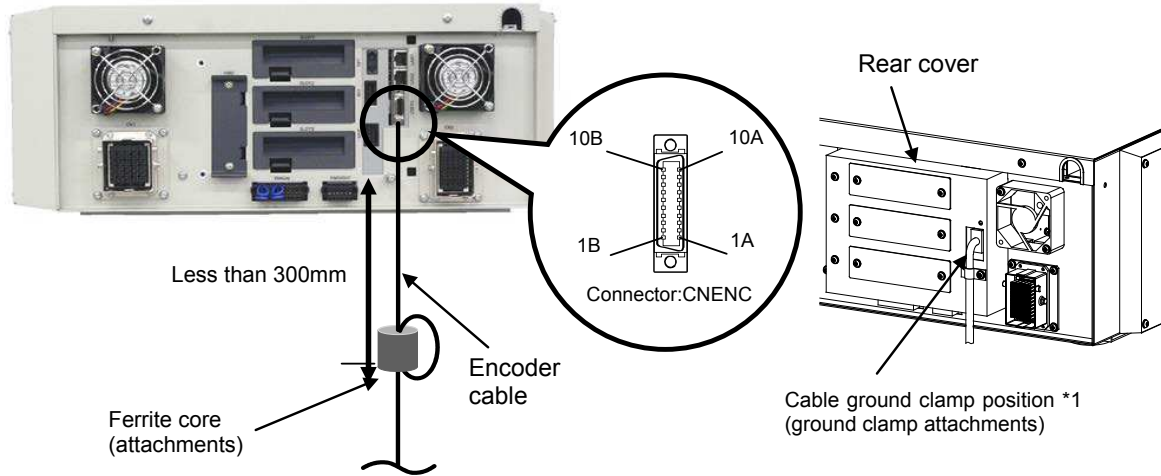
Installation of encoder cable (CR2D-700 series)
